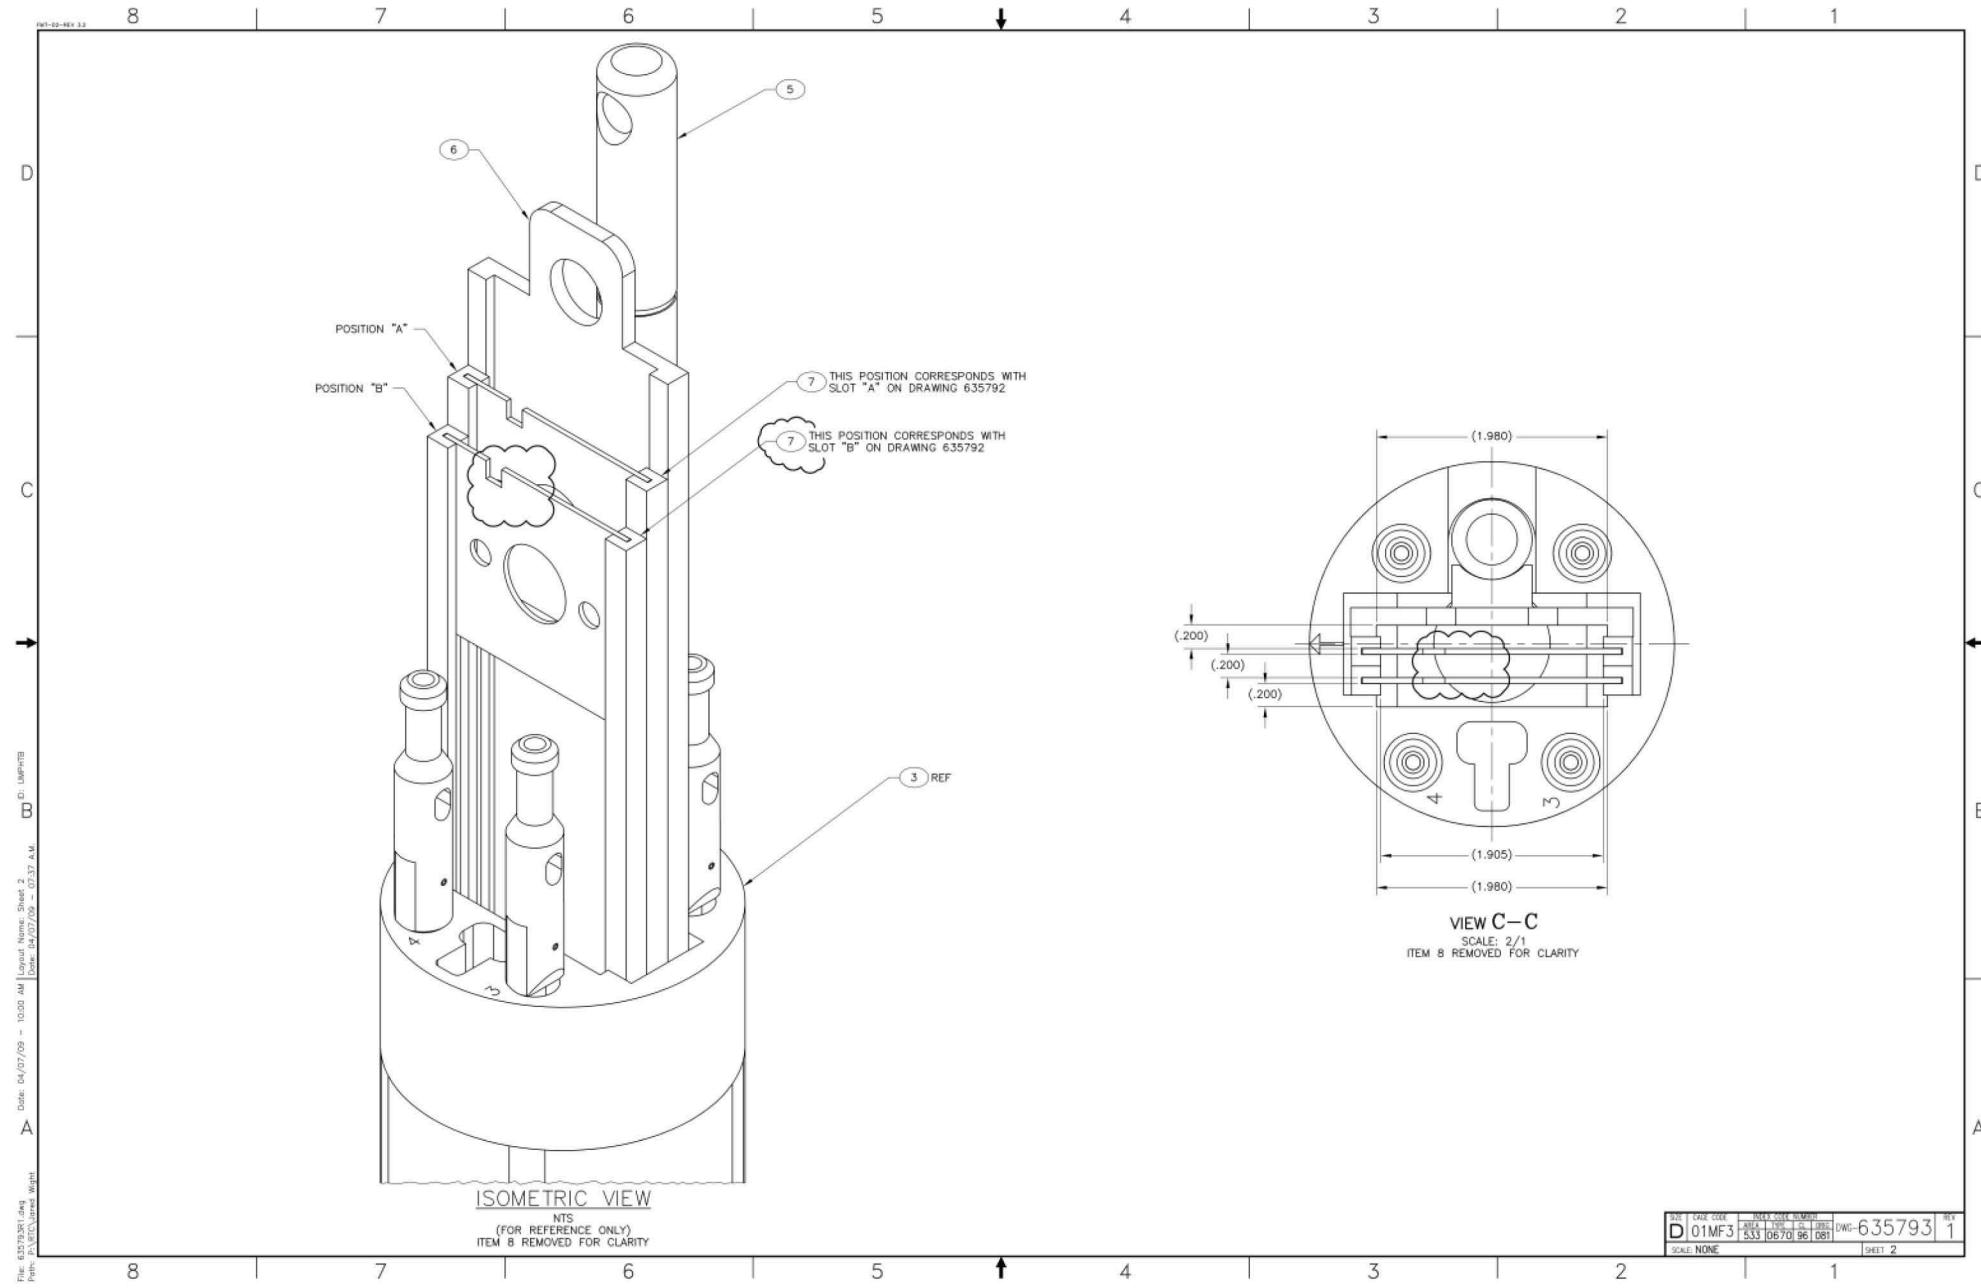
Isometric view of the AFIP-6 Test Train Assembly.
